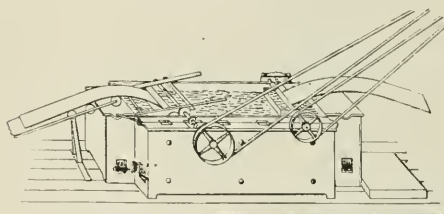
HEATHFIELD SHEET GALVANIZING MACHINE.
